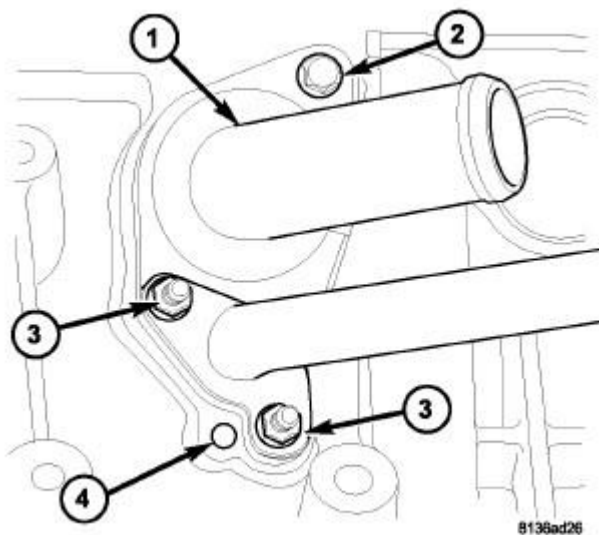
Thermostat Housing/Coolant Inlet, Fasteners & Weep Hole
